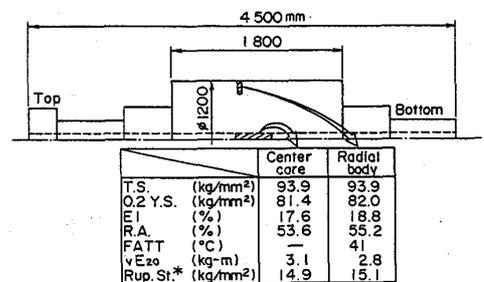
Dimension and mechanical properties of improved 12Cr rotor
